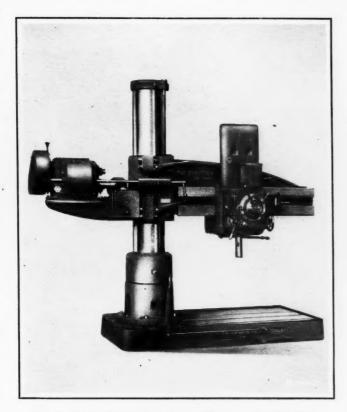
Carlton 5-foot Radial Drilling Machine with Belted Motor Drive through Gear-box on Arm
